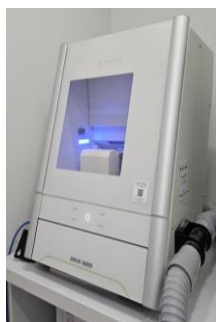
The milling machine (DWX-52D, by DG Shape) used for milling zirconia discs.
